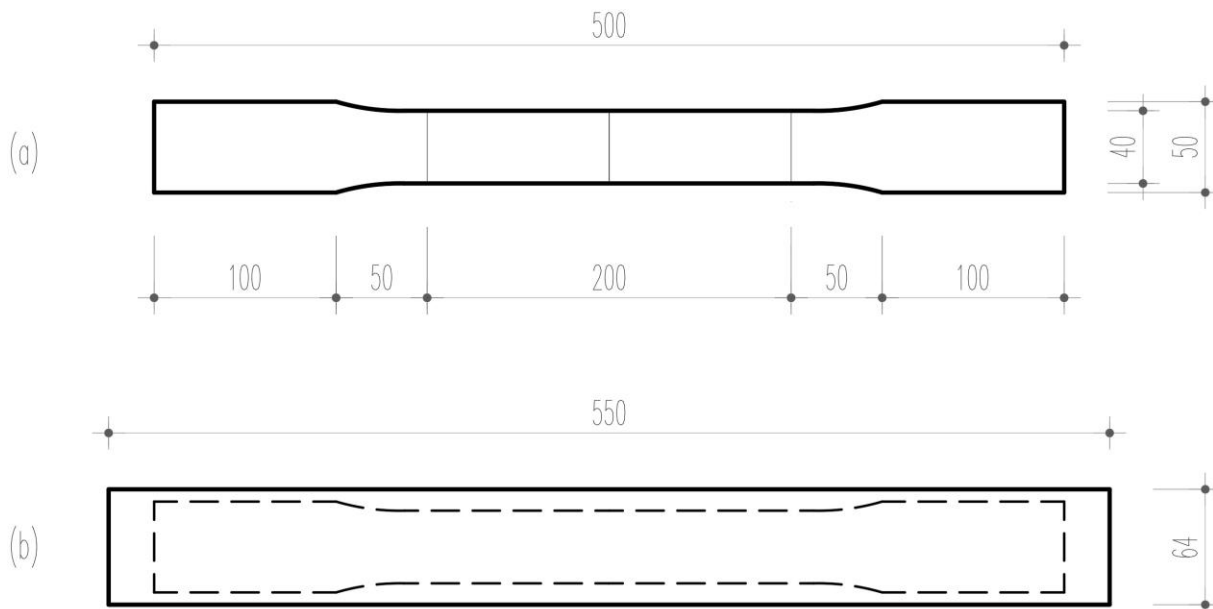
Dimensions (mm). (a) tension test specimen according to ASTM A370, (b) PVC tube for corrosion testing
